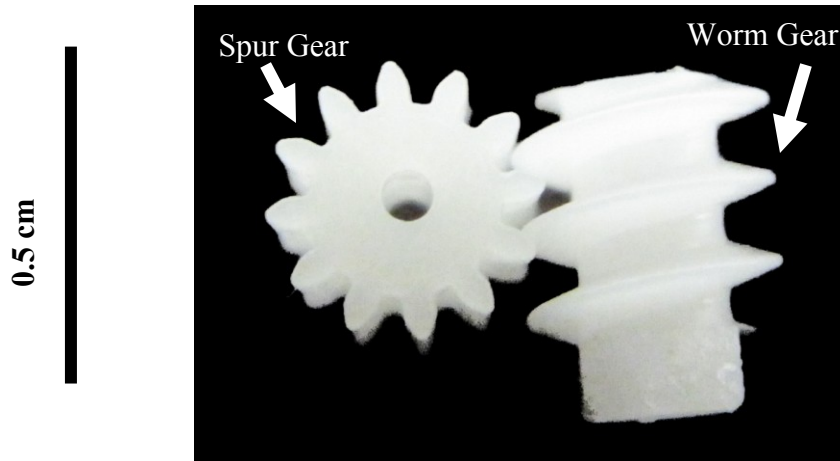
Worm Gear and Spur Gear Chosen for Newest Wheeled Platform
